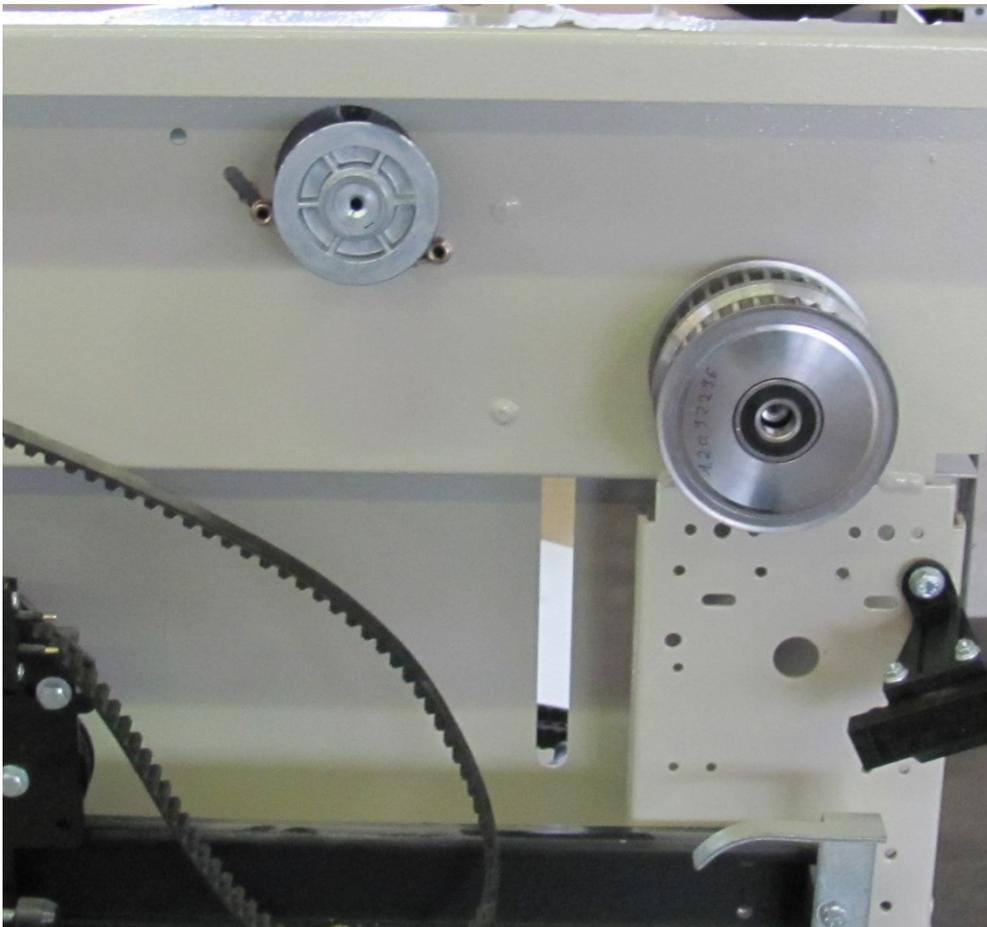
TSG drive with pinion and double belt sprocket mounted
